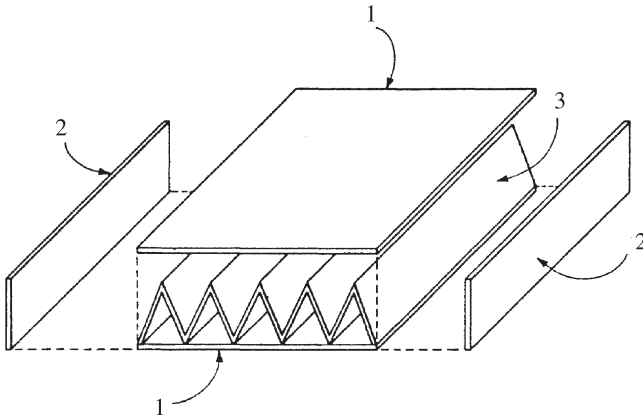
Exploded view of a compact heat exchanger core: 1, plates; 2, side bars; 3, corrugated fins stamped from a continuous strip of metal. By spraying braze powder on the plates, the entire assembly of plates, fins, and bars can be thermally bonded in a single furnace operation. (From Kraus et al., 2001, with permission.)
